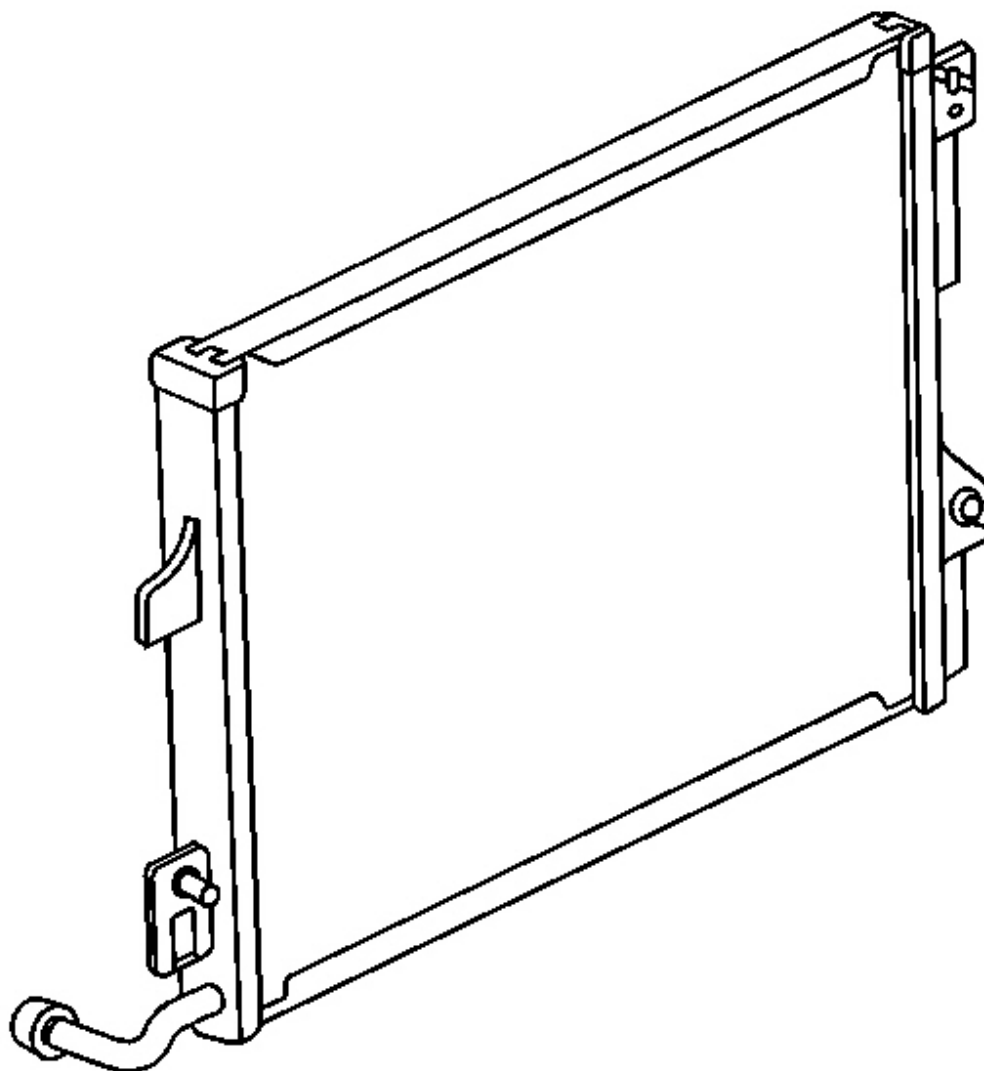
Inspecting Condenser Insulators At LH & RH Front Edges For Damage
